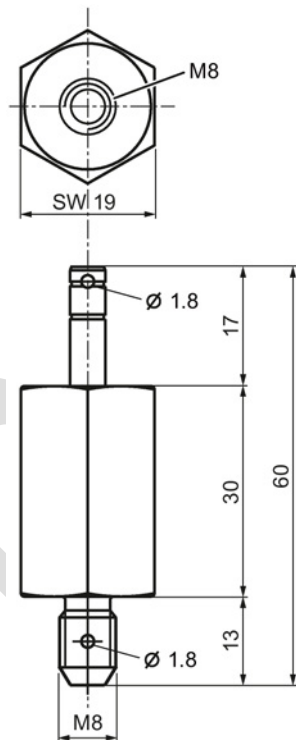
Dimension drawing of quick change holder 6GT2690-0AH00
